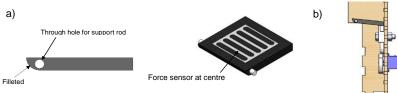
A) TEST PLATE DESIGN, INCLUDING THE PLACEMENT OF THE FORCE SENSOR. B) SIDE VIEW OF THE THE TEST PLATE AT REST, WITH THE NON-FILLETED END SITTING ON THE FOLLOWER OF THE MECHANISM.
